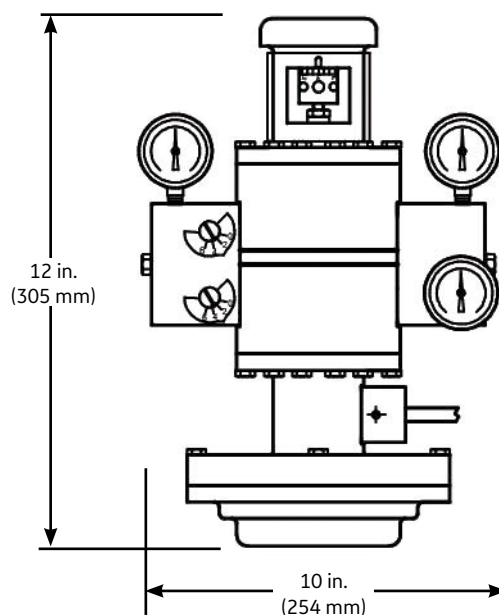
Overall dimensions of HPP-4 Positioner (Standard Range)
